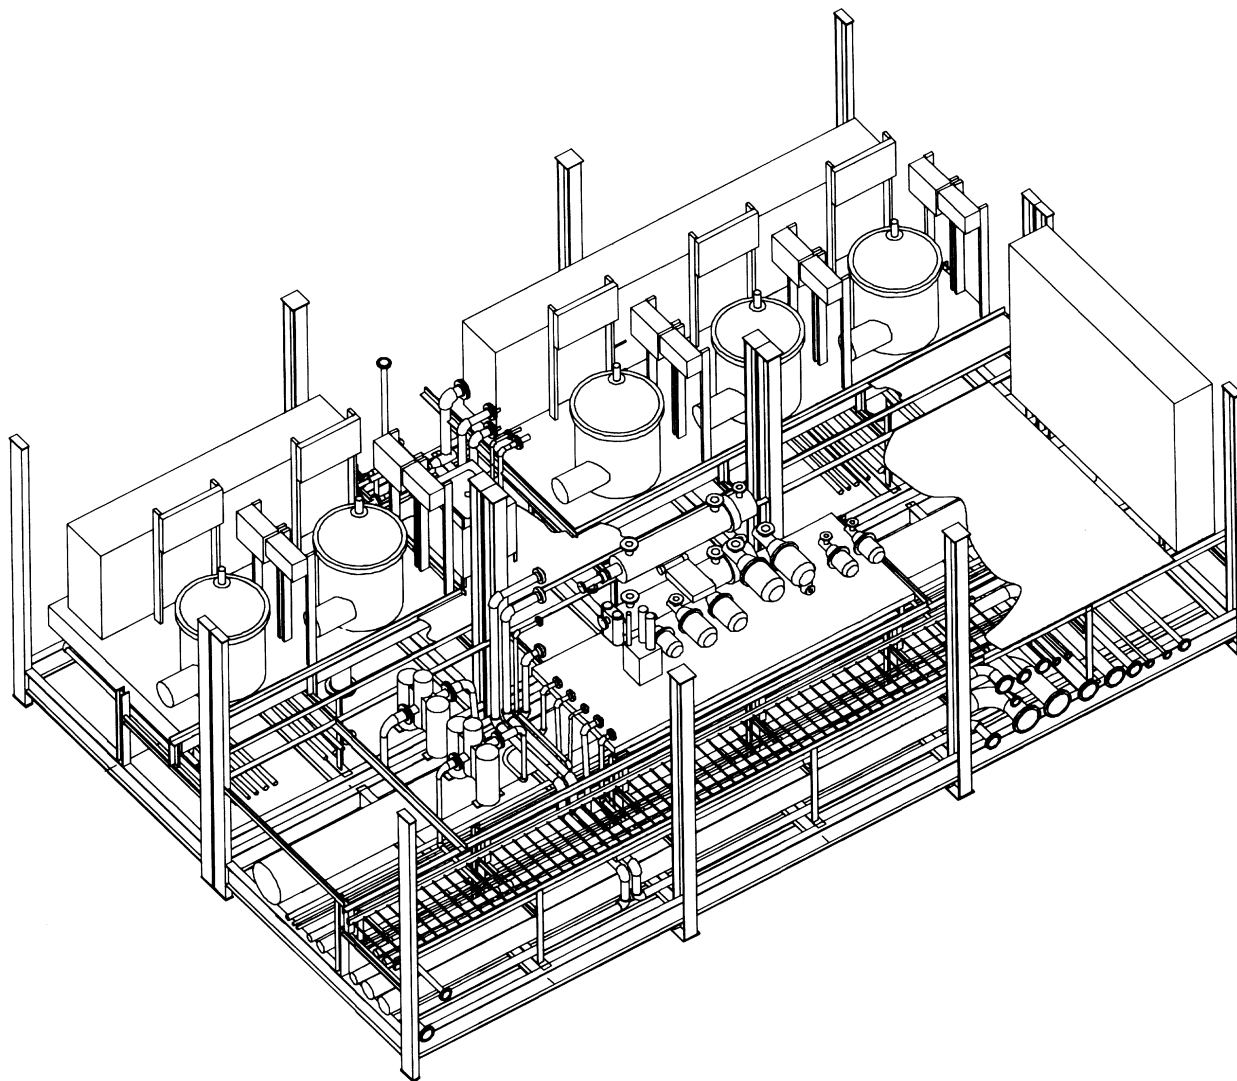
Two Standard Machinery Units Containing LO, FO & DO Service & Purification System Units
